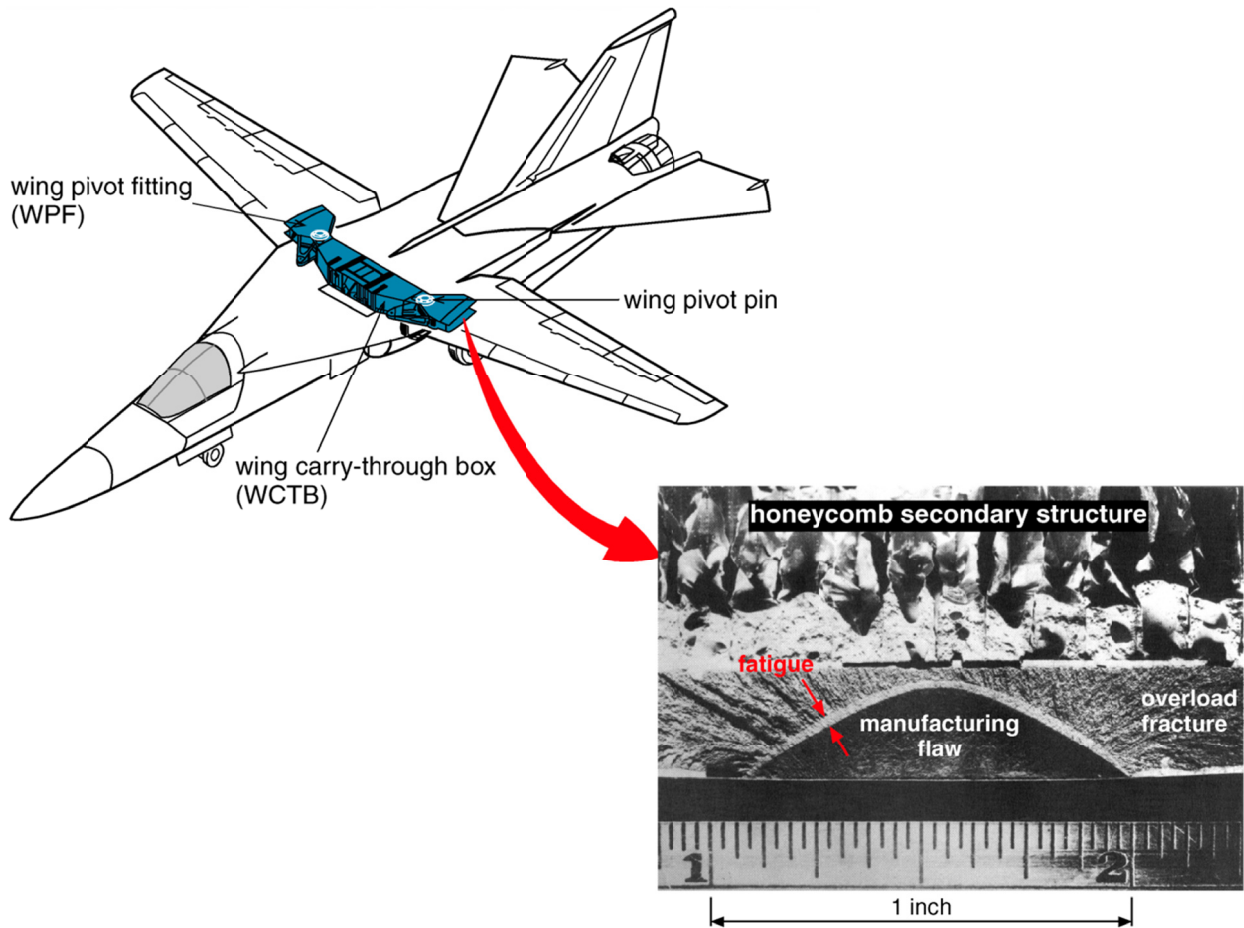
Origin of F-111A wing pivot failure: a large manufacturing defect [9]
